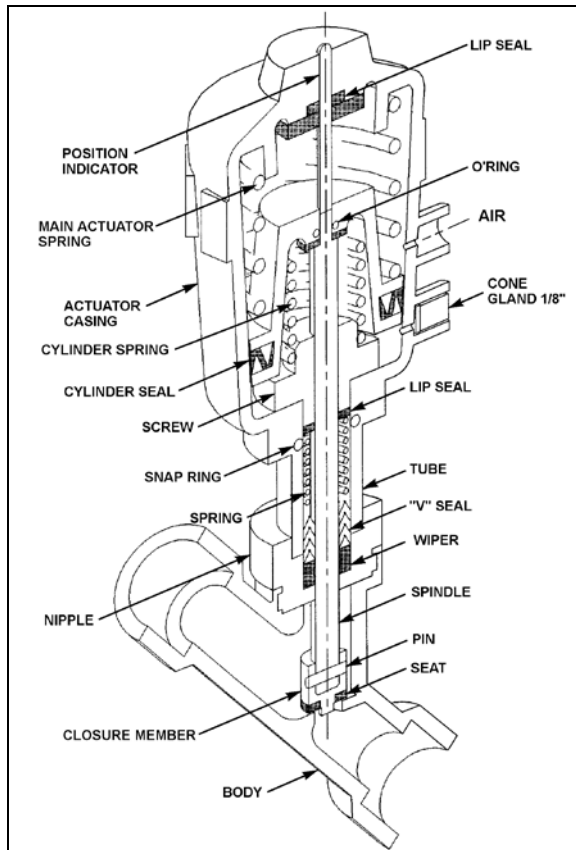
DRIVER'S PNEUMATIC WATER VALVE
